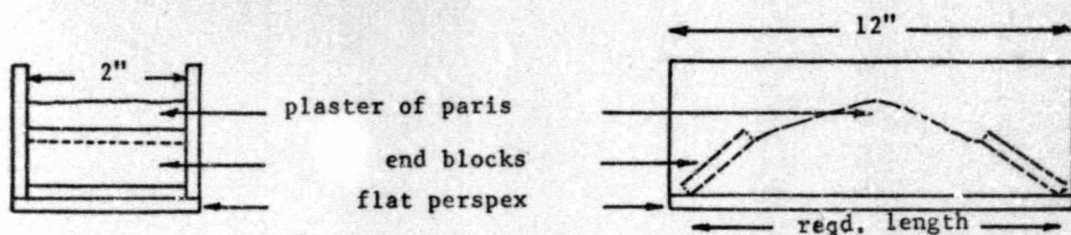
2" WIDE MOULD WITH FLAT PERSPEX BOTTOM
